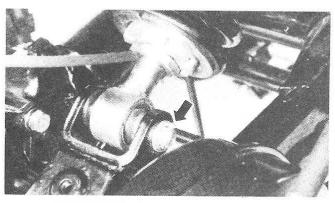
On YTM 225 models, remove the cotter pin (arrow) and drive out the pivot shaft to detach the lower shock mount (Sec 7)
